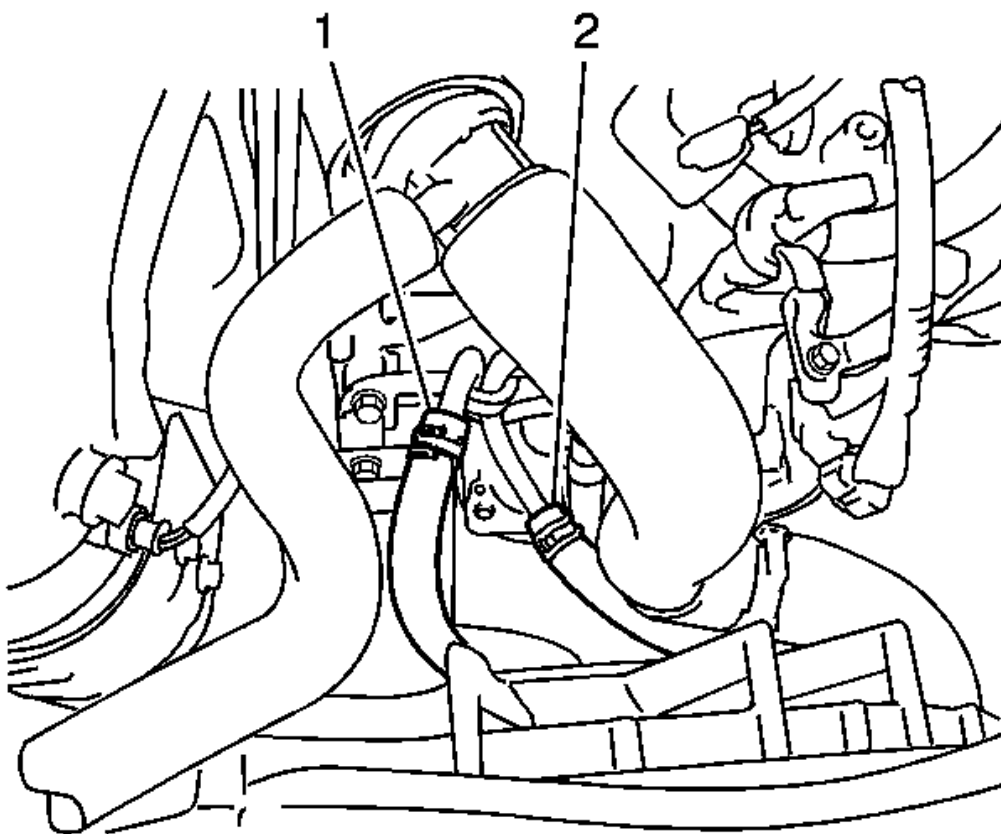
View Of Oil Cooler Hoses - Automatic Transaxle
